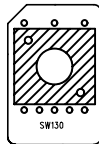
EU03D Front Switch PC Broad (Top side)
